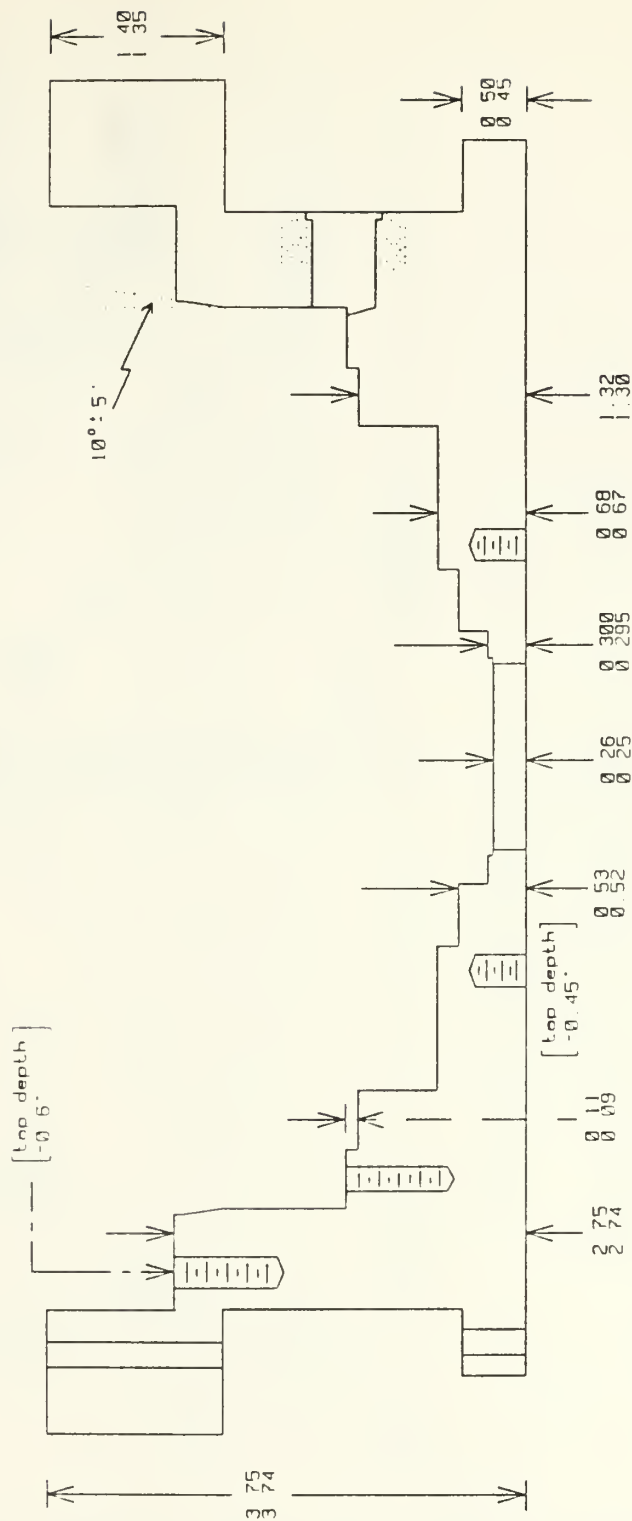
Cross-sectional View of the Driver Housing Showing Vertical Dimensions along X-X' in Figure C-1
